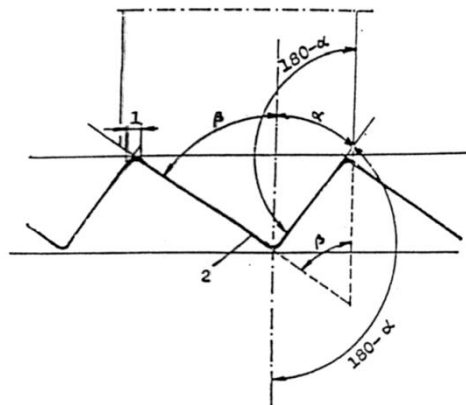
Cross-sectional view of the grinding roller grooving profile (Muchová a kol., 1996)
